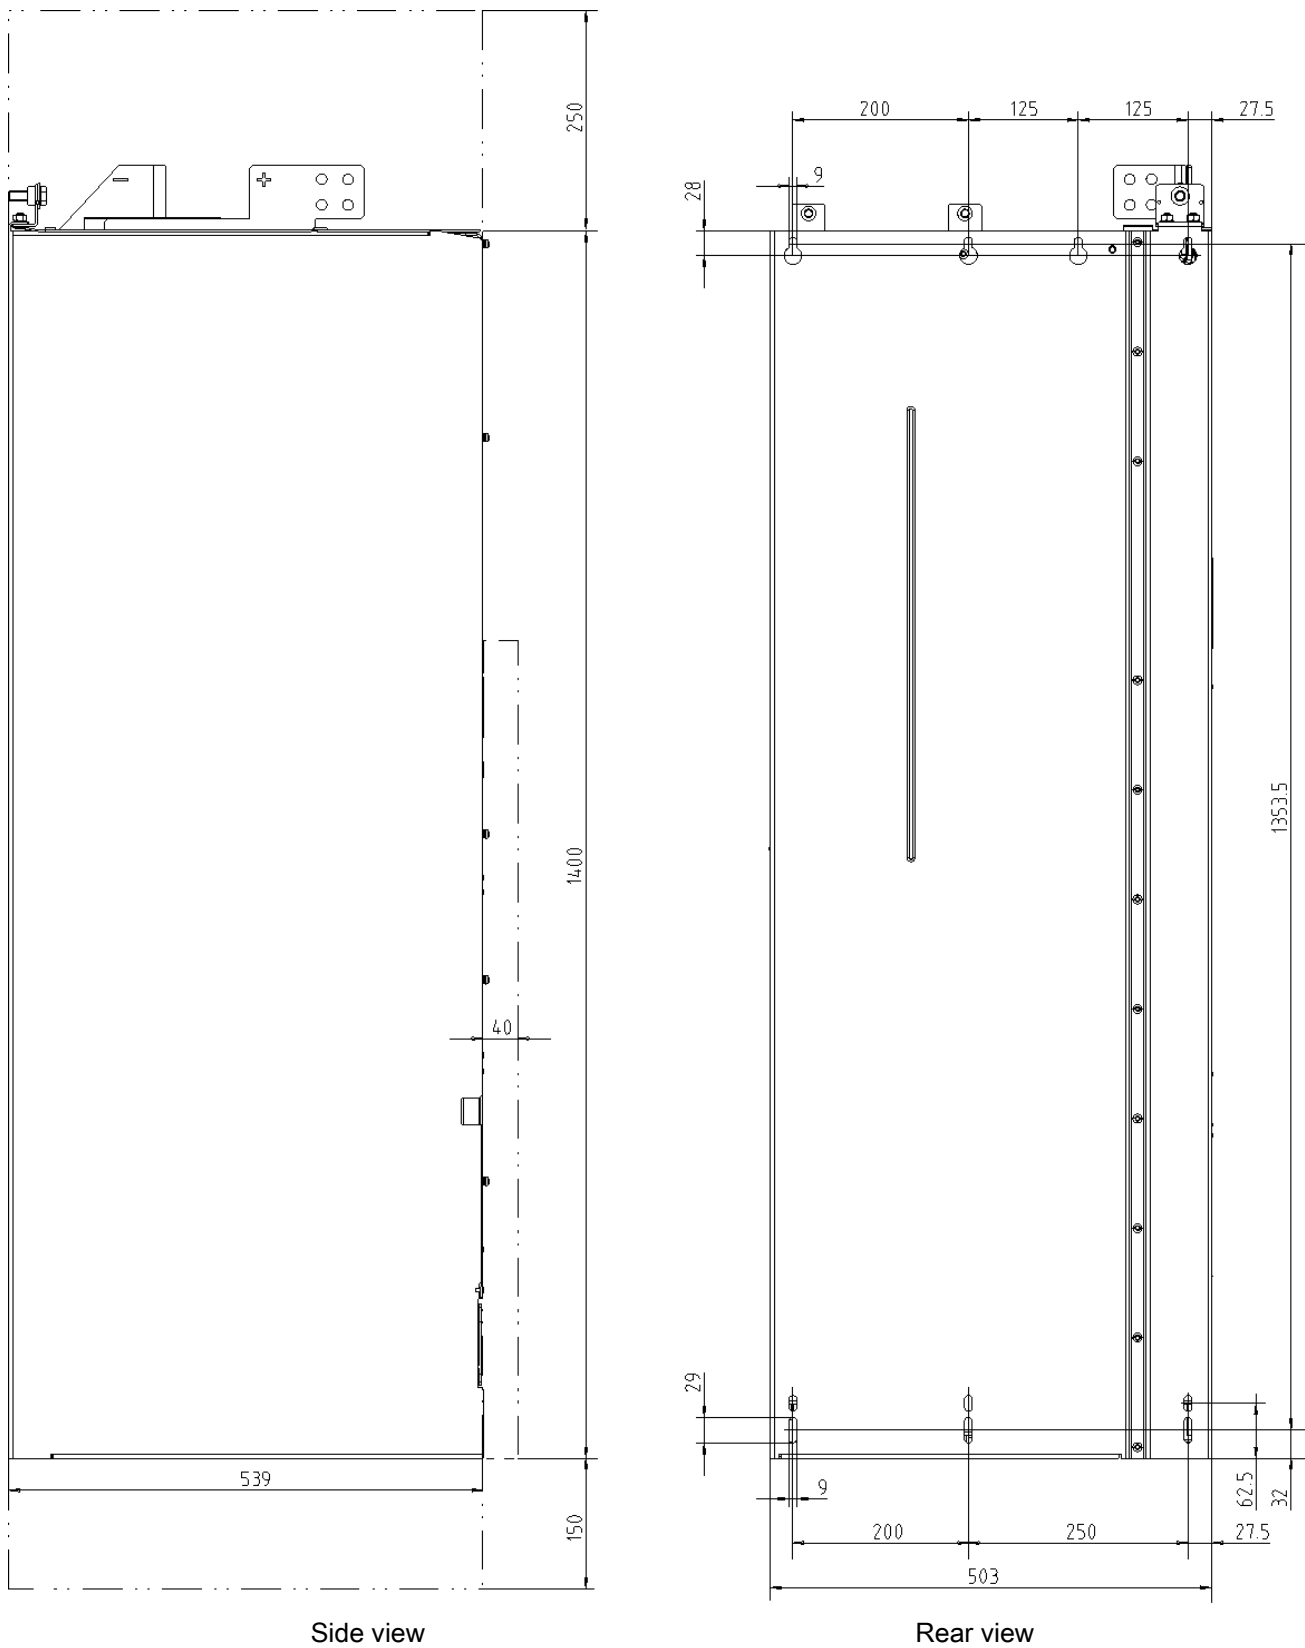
Dimension drawing of Active Line Module (type HX)
